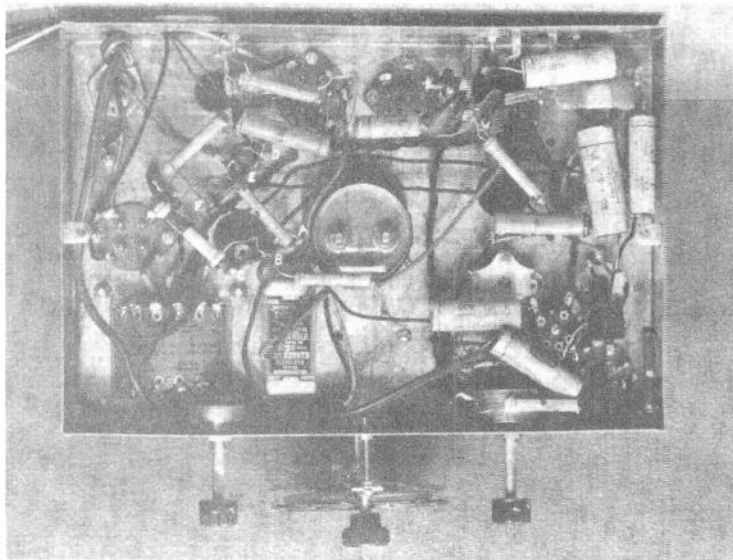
A bottom view of the completed 5 tube superheterodyne chassis. This view is given to show the location of various parts, particularly the terminal strip which you will mount.
